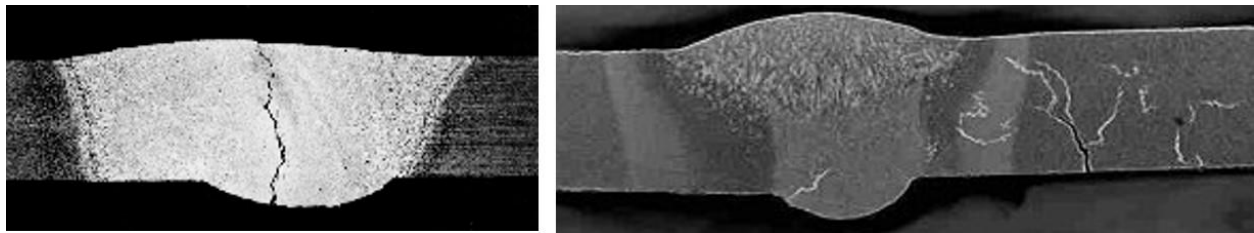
Examples of hot cracking in weld zone and HAZ during fusion welding of aluminum alloys [51].
